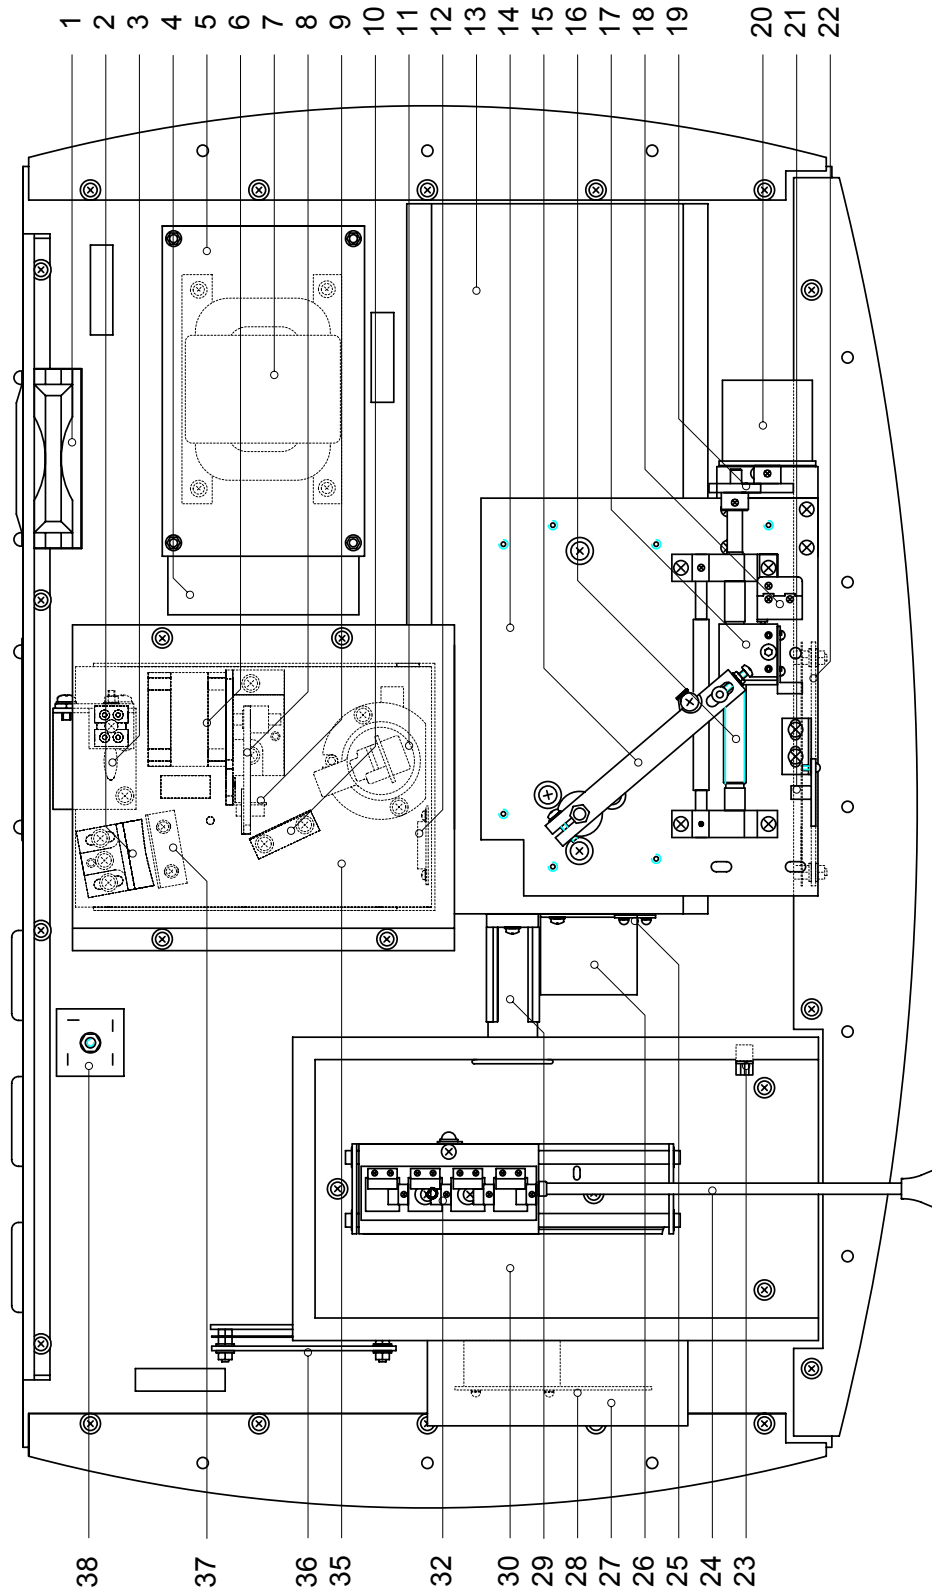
Layout of UV-2802, UV-2802PC Inside Top View
